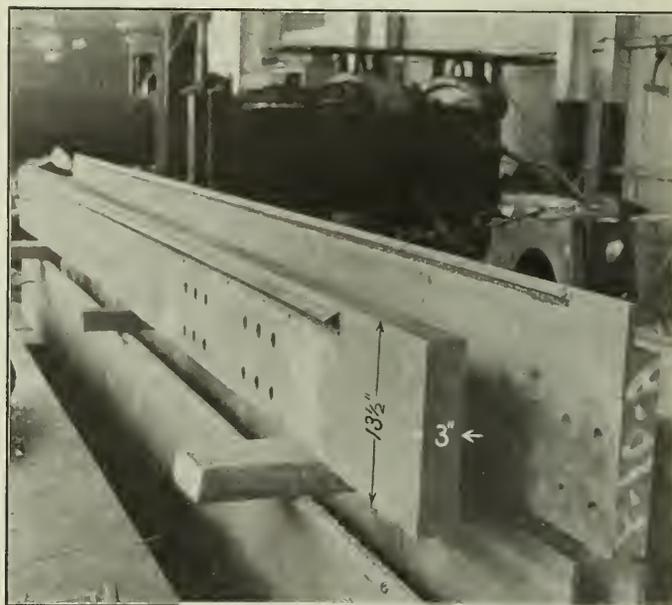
Two Bus Bars on which Triangular Strips have been Welded.
